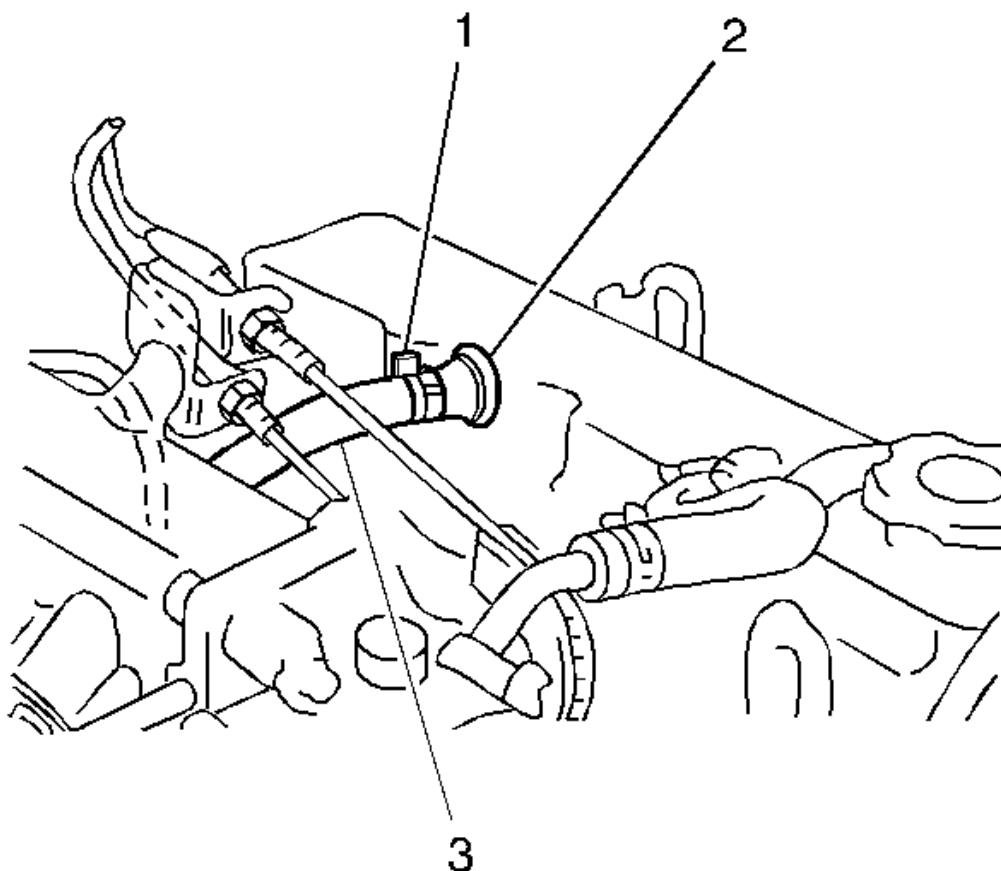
View Of Intake Manifold Vacuum Hose, Clamp & Valve Cover
